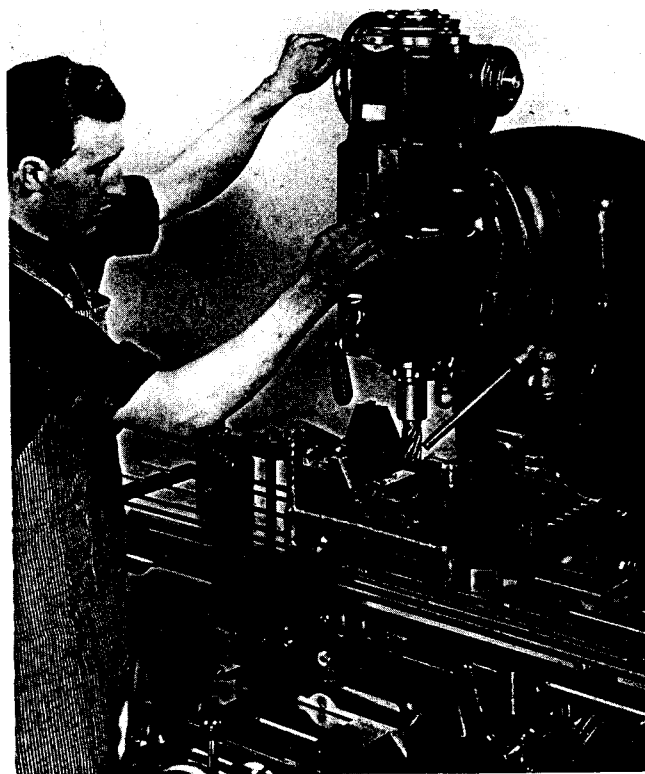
A typical step-milling job. One horizontal surface has been end-milled, the gage block for that depth has been replaced by one for the next depth of cut and the operator is lowering the spindle until the stops bear against the gage block, preparatory to milling the next surface.
